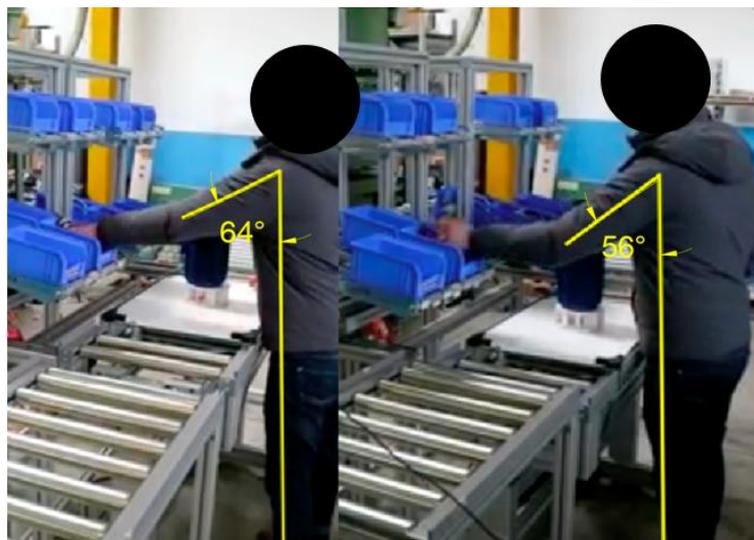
Picking of the rotor from the module (left: fixed workstation; right: SASAS)
